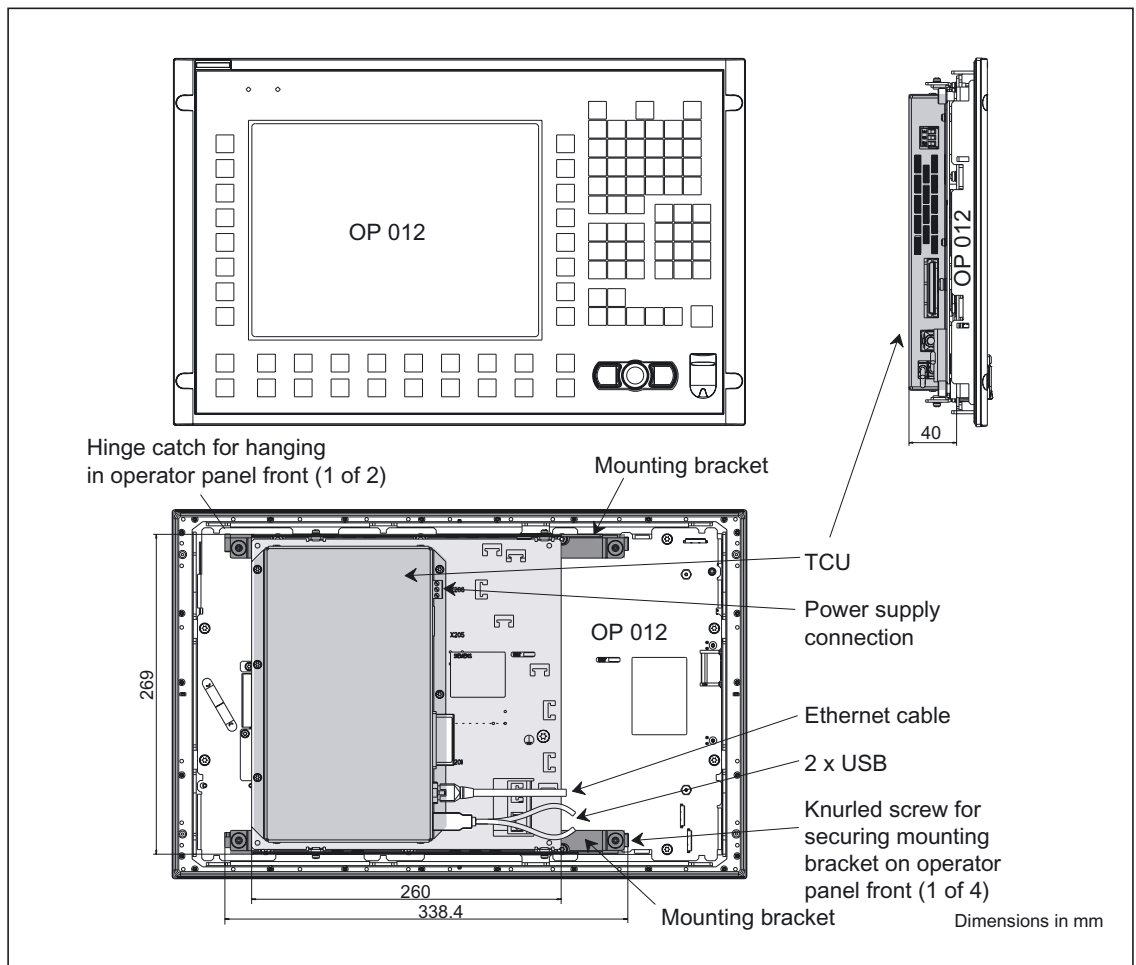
Mounted TCU (example with OP 012) in front, side and rear view
